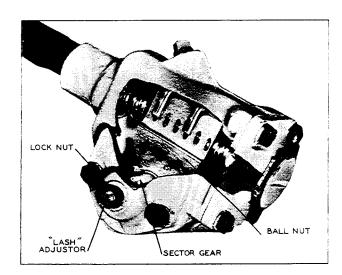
Steering Gear Lash Adjustment (Sector Gear)
